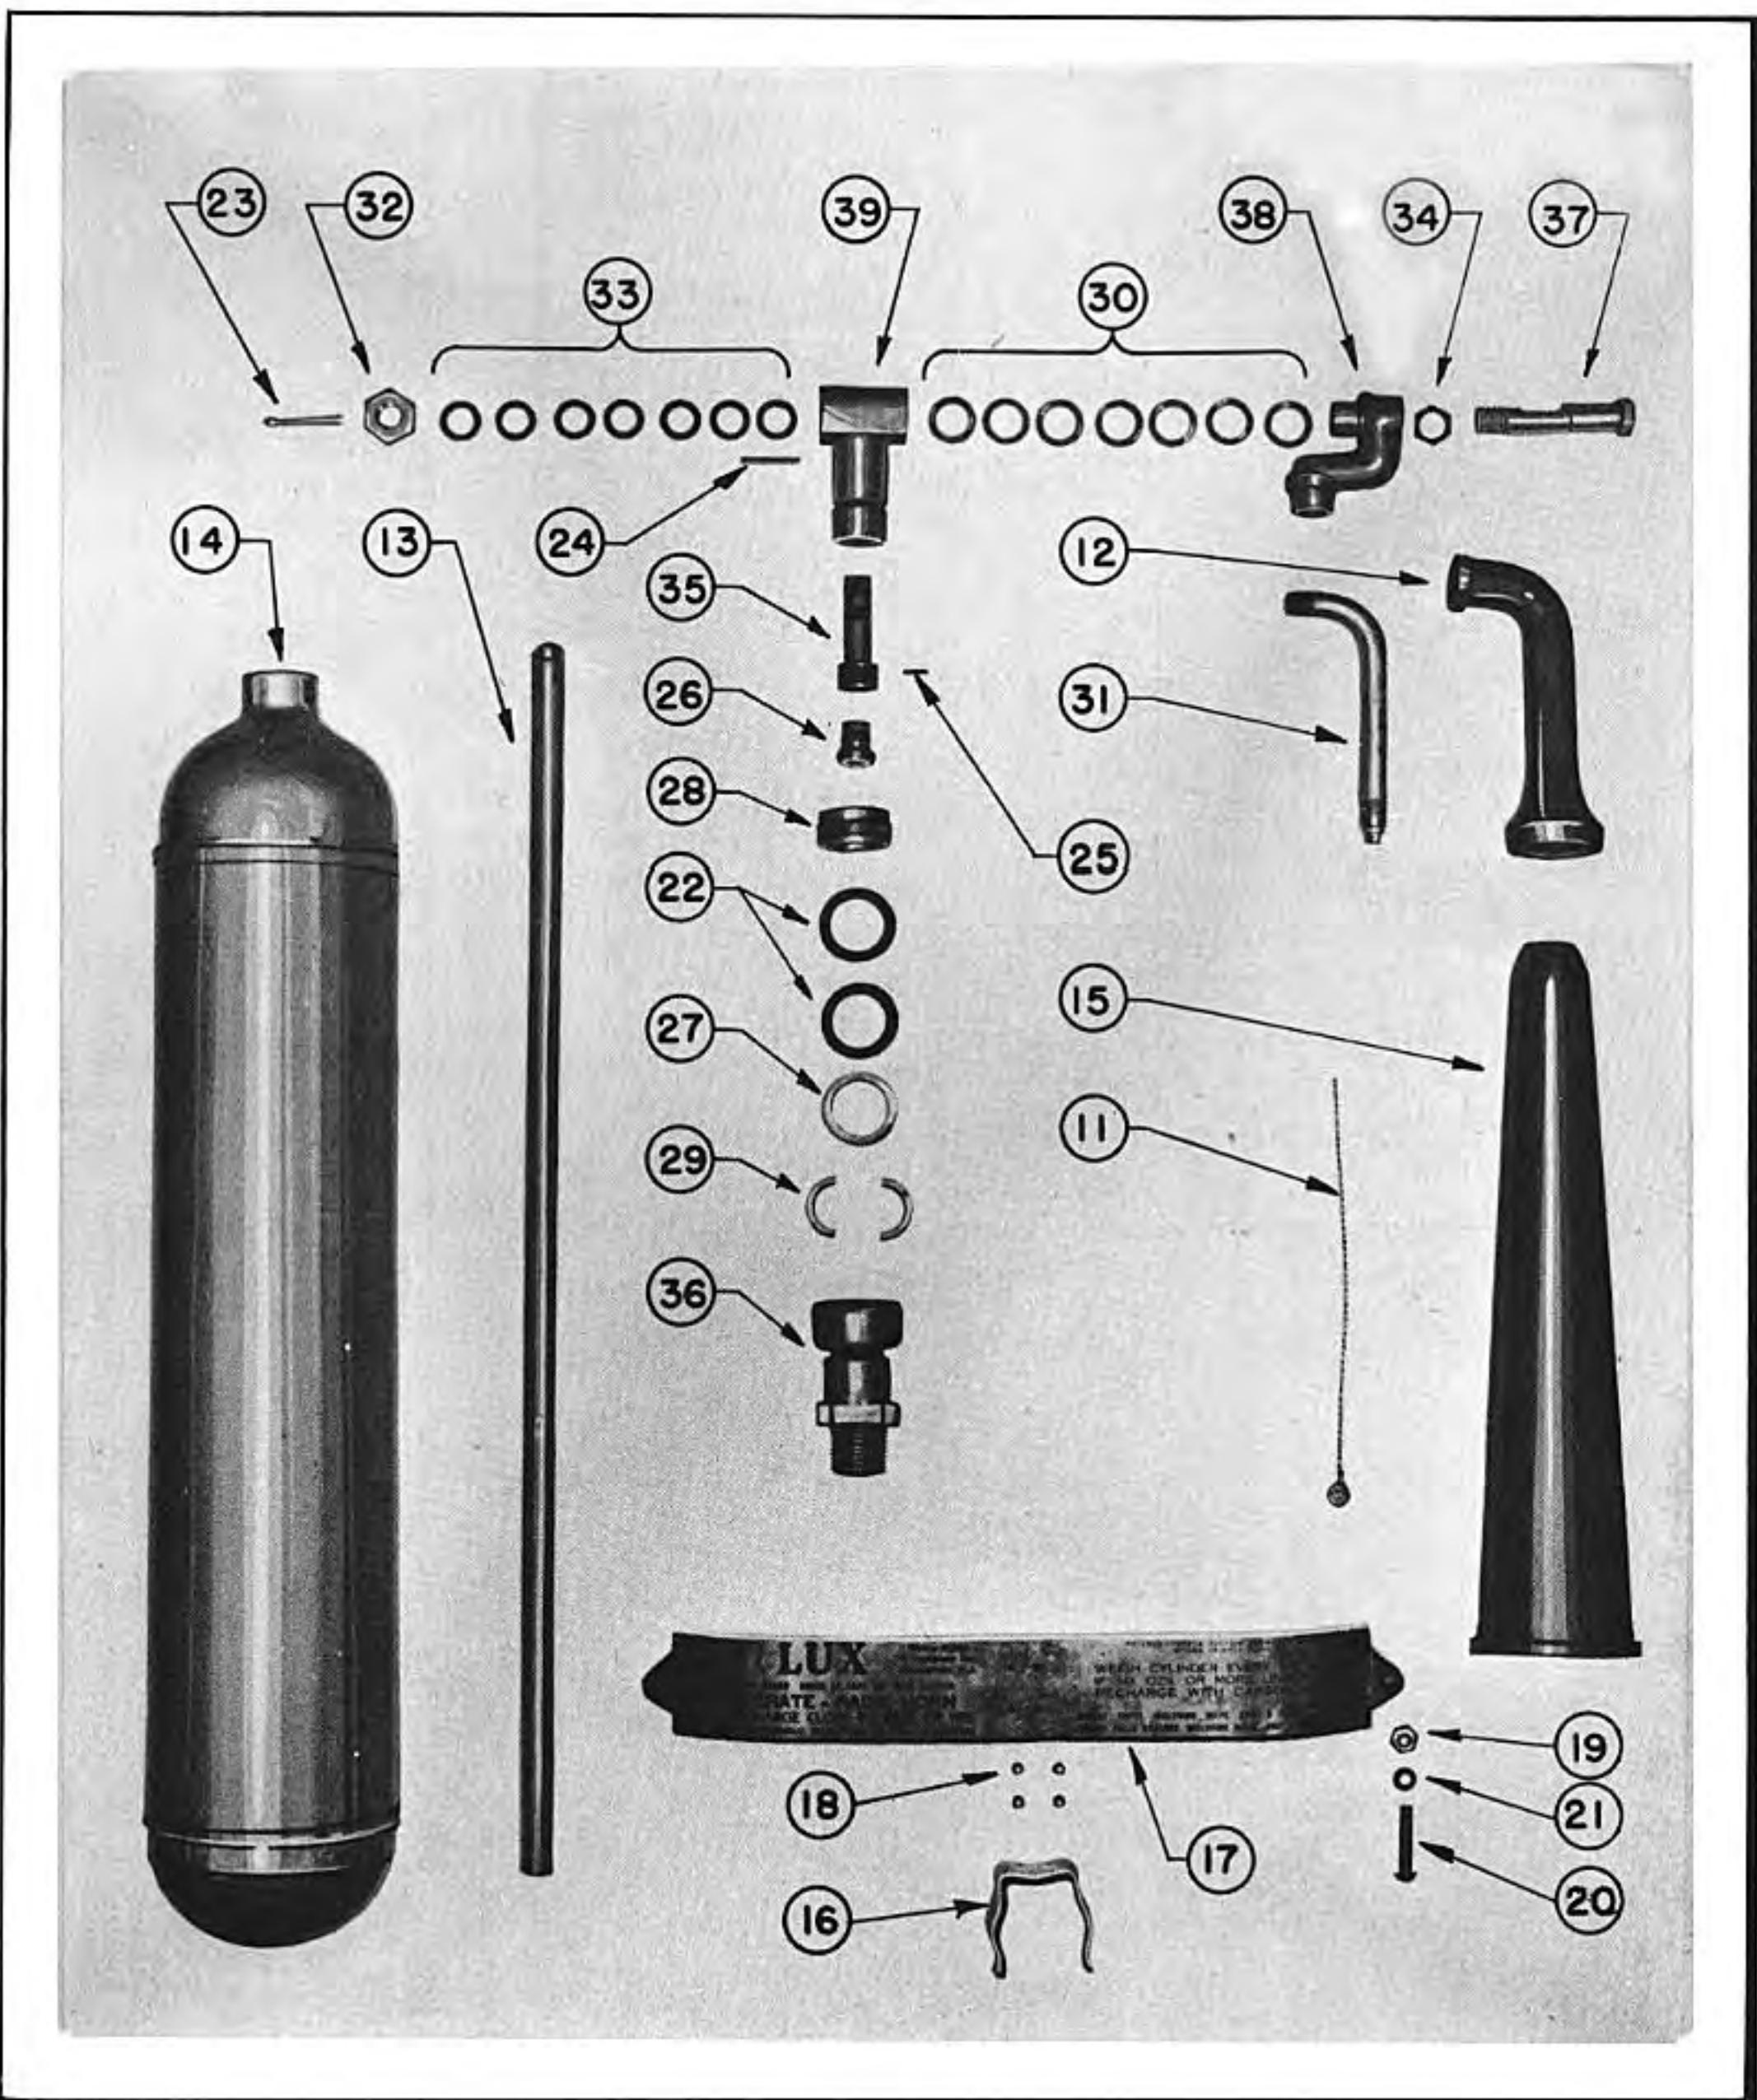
Exploded View - Type A-17 Portable Fire Extinguisher
